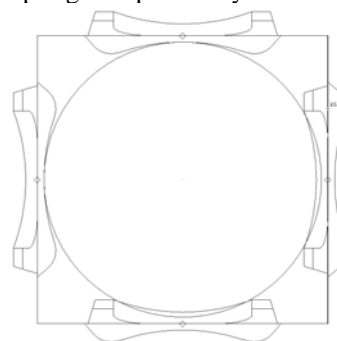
A dual cooled fuel rod and a unit cell with newly designed springs and dimples.
